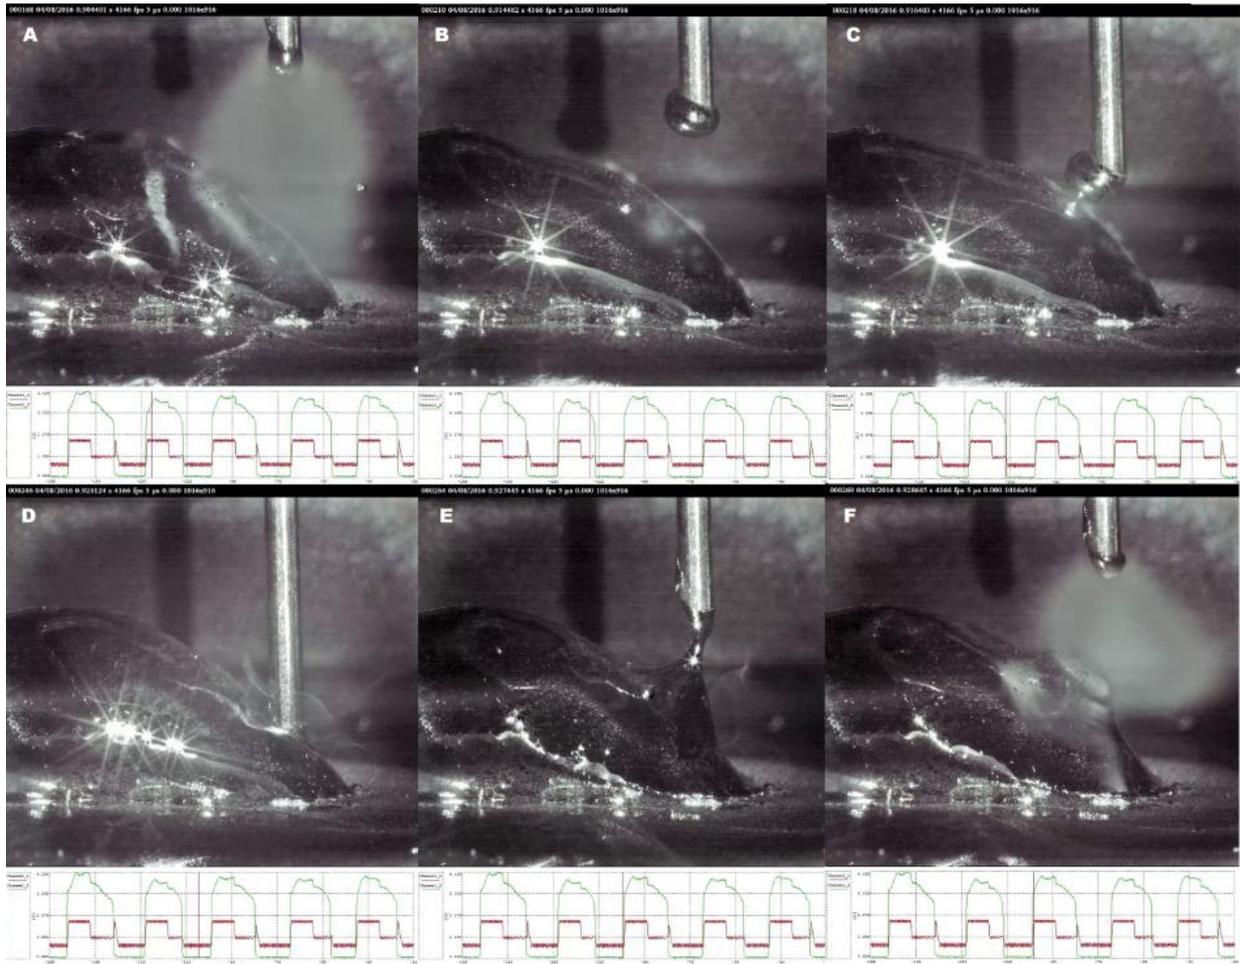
Sequence of the metal transfer using the prototype on aluminum MIG welding, ER5183 wire electrode
